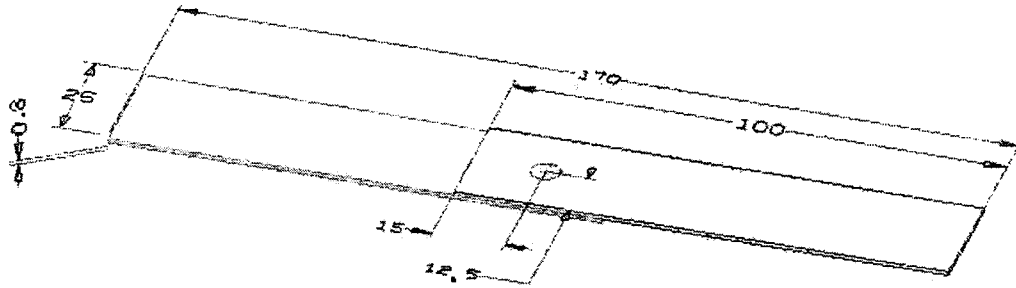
Specimen of lap joint with single spot welding (unit : mm)
